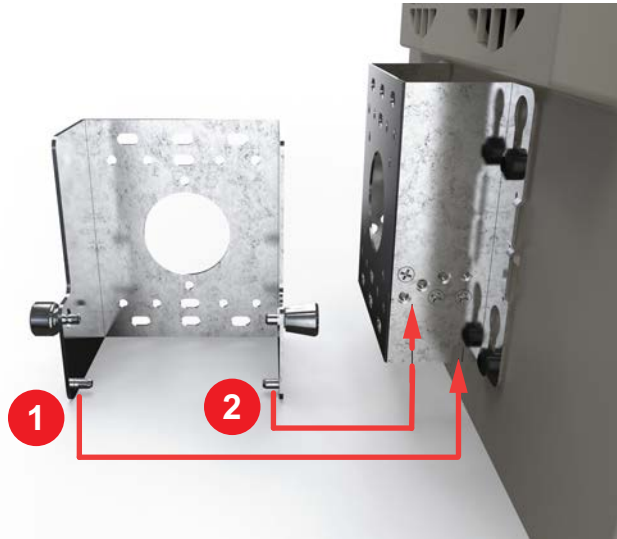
Attaching the SCRN-530 with Ceiling-Mount Bracket to the Wall-Mount Bracket
